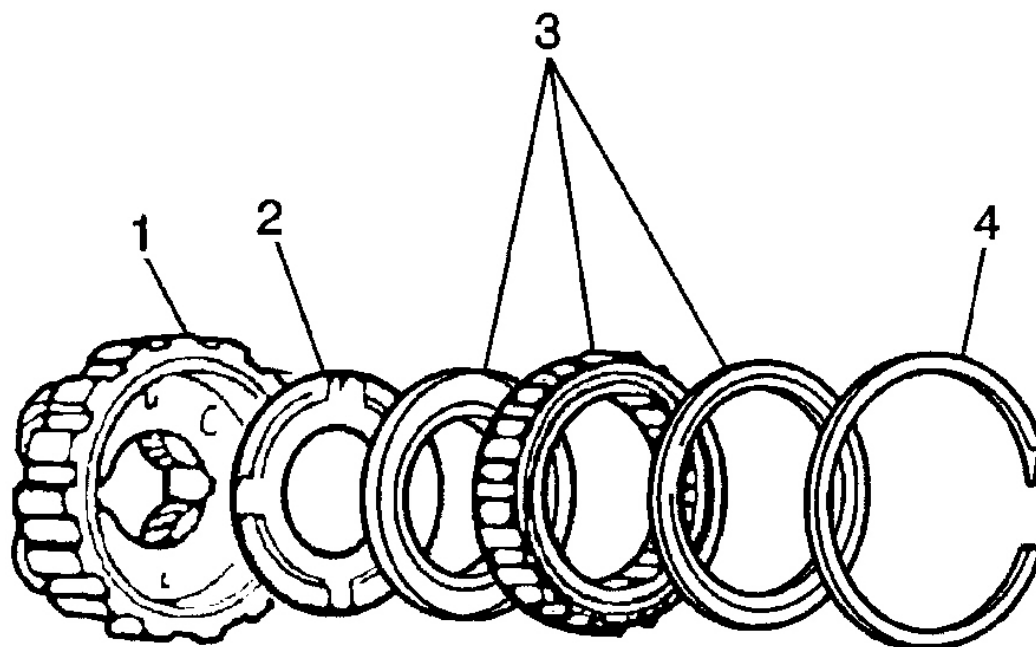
Removing Front Planetary Gear Components (1 Of 2)
